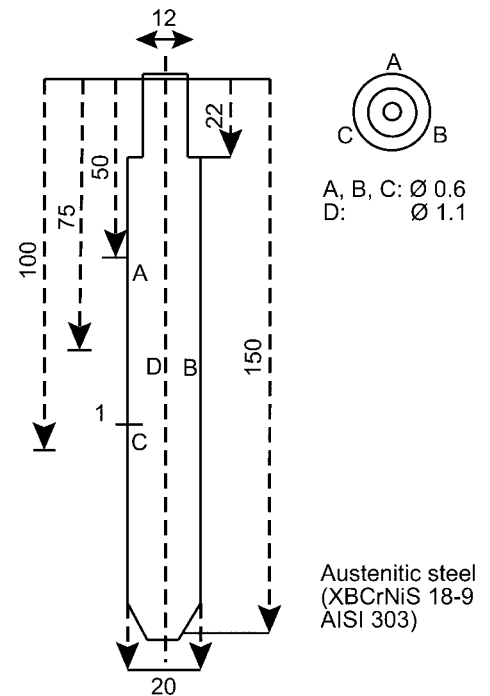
Luebben et al. type 303 austenitic stainless steel probe with chamfered tip. All dimensions are in millimeters. Source: Ref 123
